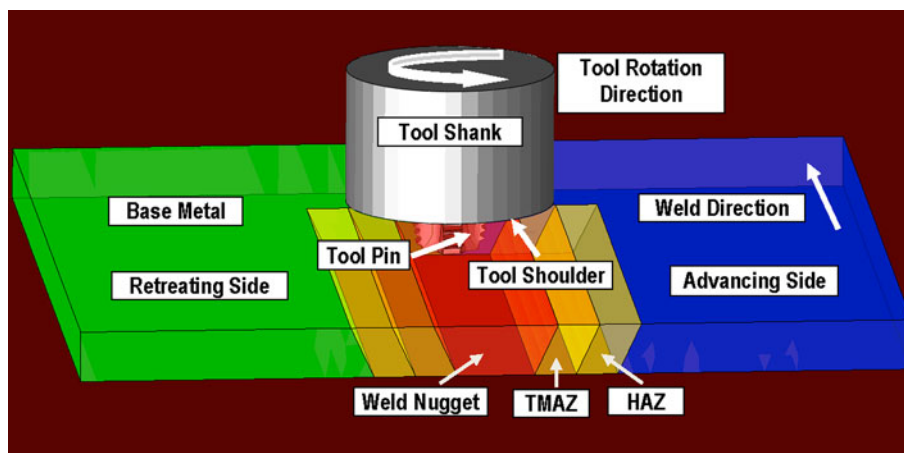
A schematic of the friction stir welding (FSW) process
